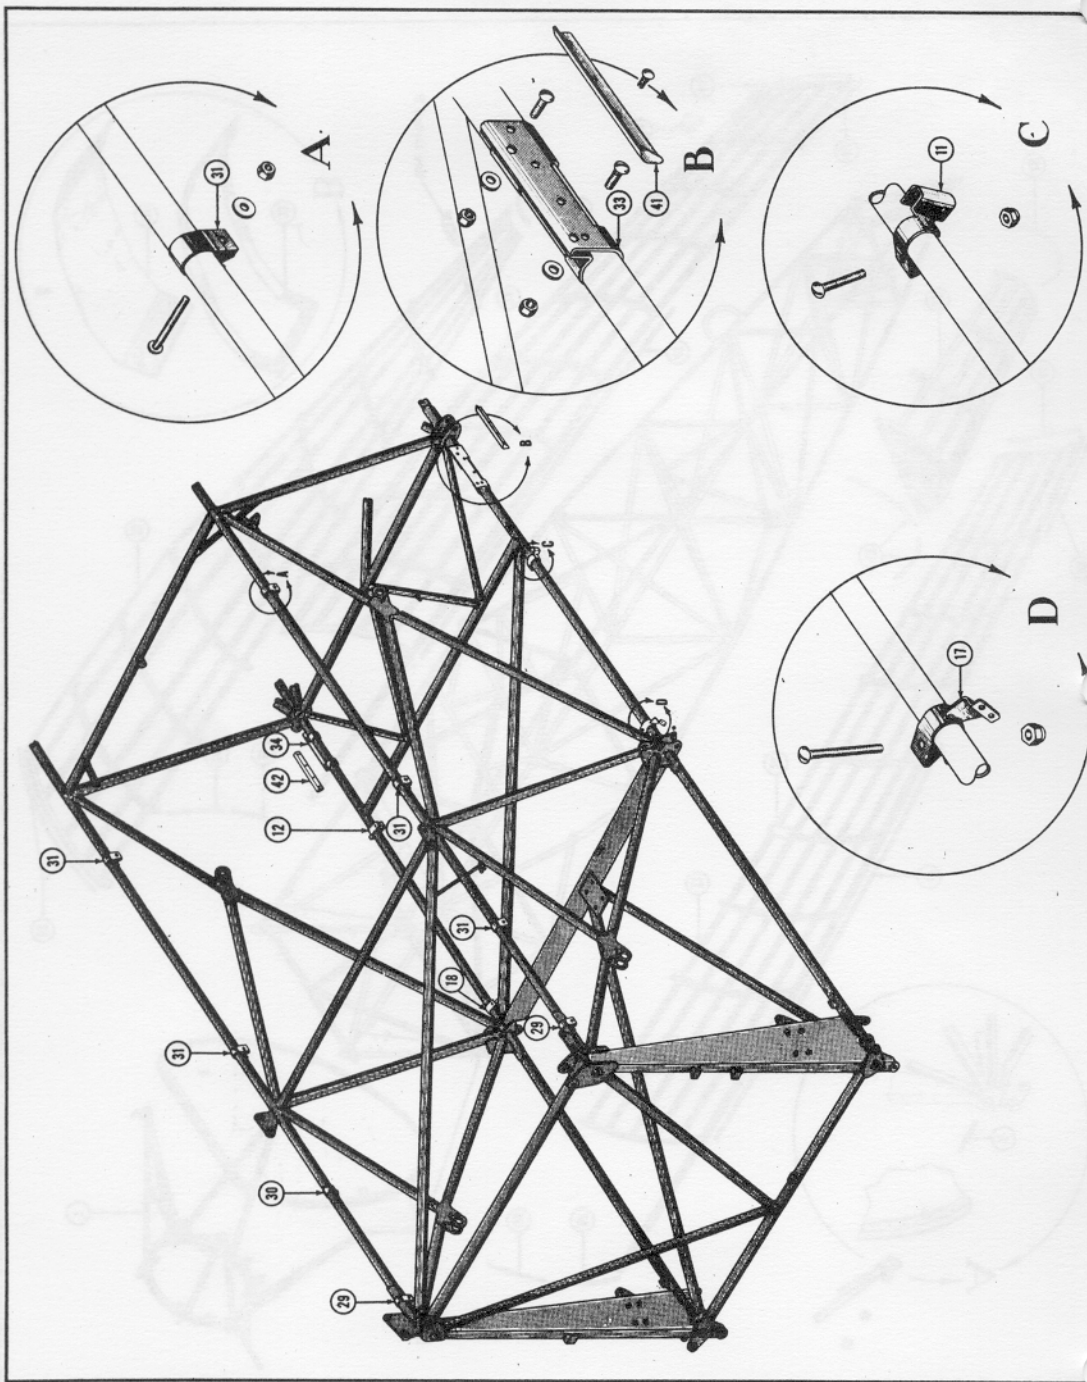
Fuselage Fairing and Covering Installation (Sheet 2 of 4 sheets)
